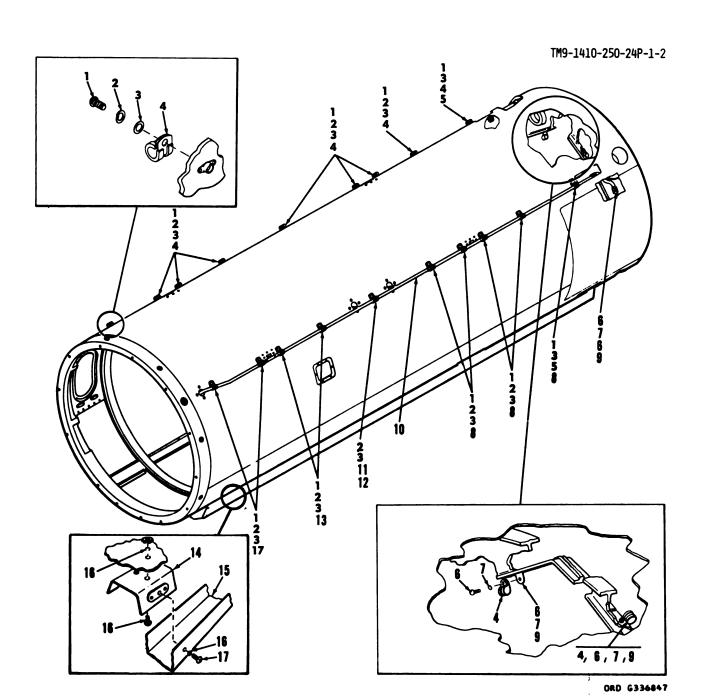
FIGURE SA. EQUIPMENT INSTALLATION, ENGINE SECTION /9028467/
